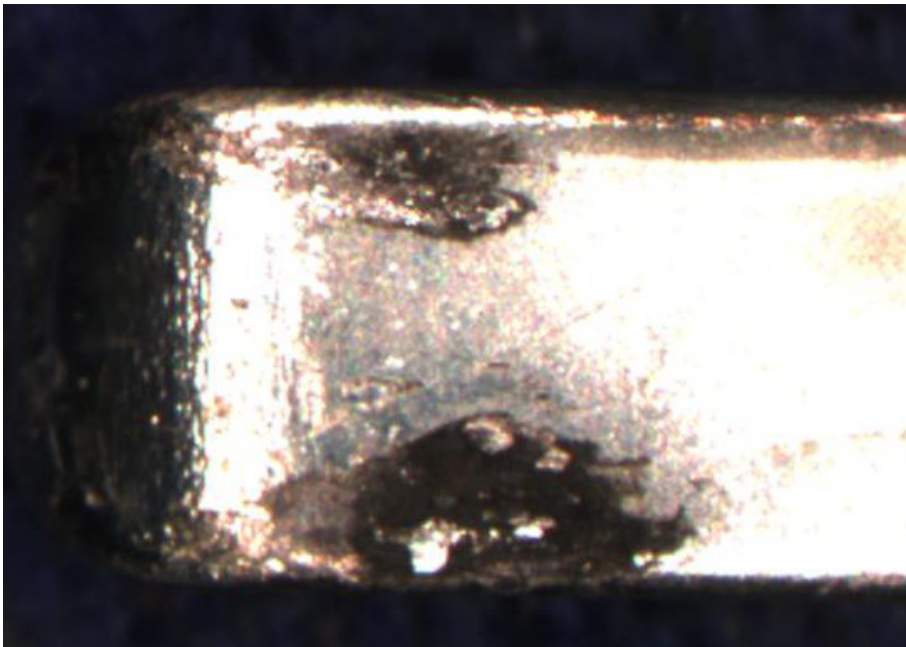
Fretting wear of a tin terminal [Courtesy of Molex]
